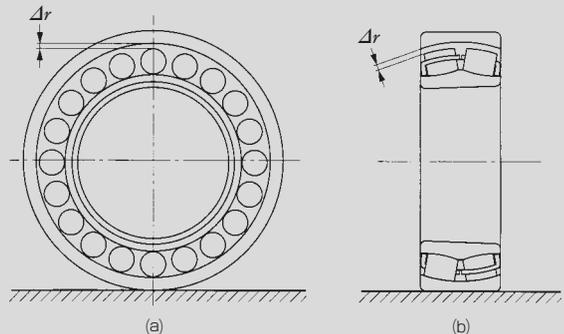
Clearance Measurement Point (Bearing Outside Diameter: Less Than 200 mm)
